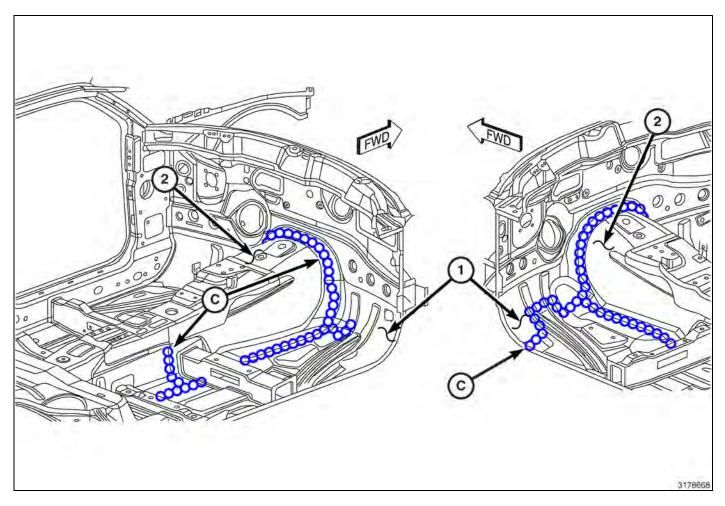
Front Floor / Dash / Tunnel (2 of 2)
